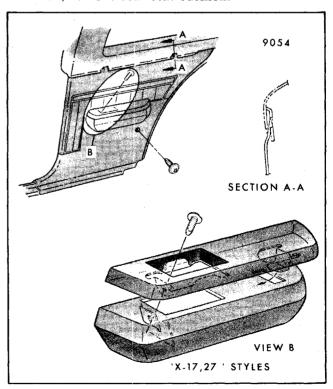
Quarter Trim and Armrest Attachment - X-17,27 Styles
